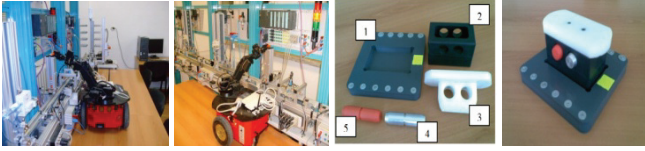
a) and b) assembly line, Hera, served by WMR, Pioneer 3-DX, equipped with RM, Pioneer 5-DOF Arm; c) parts; d) assembled product
